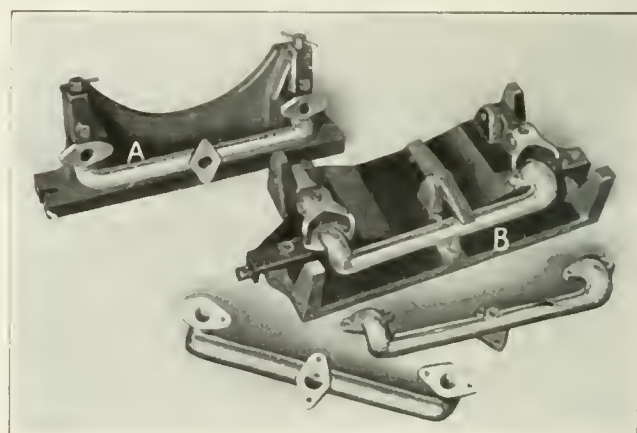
Milling and Drilling Jigs for the Inlet Water Pipes
